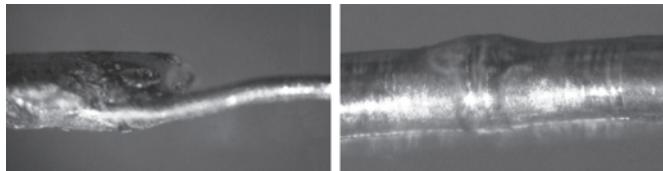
Visual aspect of a soldered contact and pulsed laser welded wire [9].
